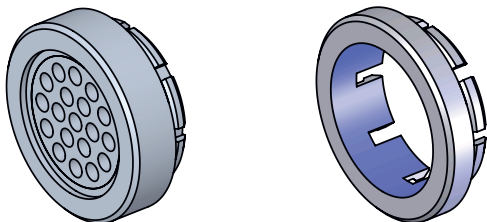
Patented flame guard Type 6539A1Q01, diaphragm protection ring Type 6539A2 (both can be mounted without tools)
